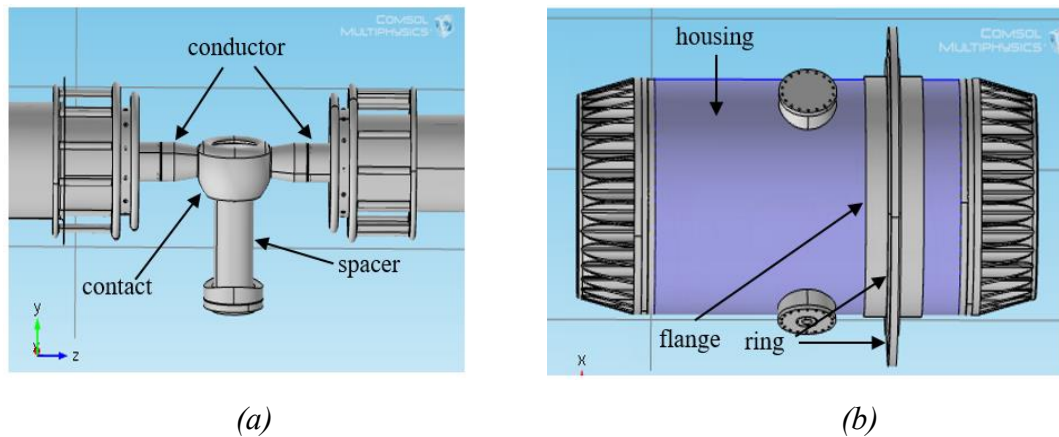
(a) 3D structure of internal view of the central part of the bushing (b) External view of the central part of the bushing.
